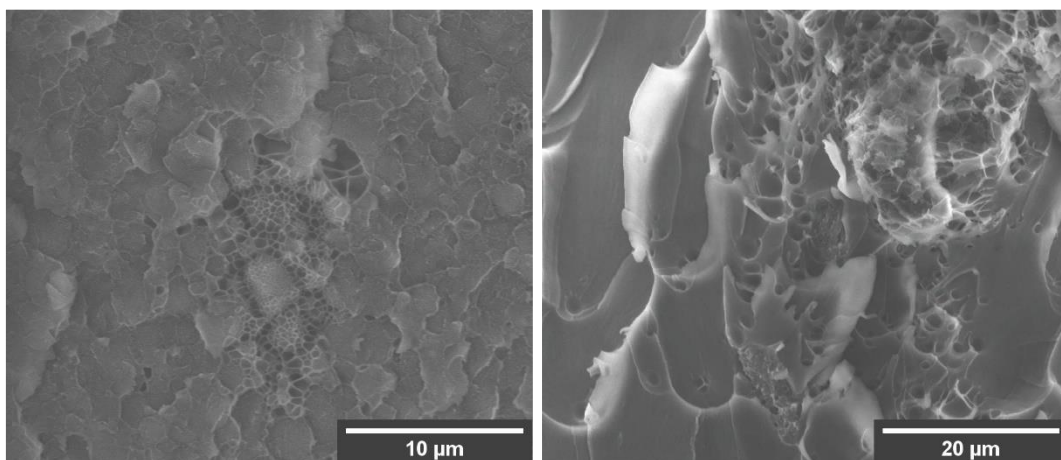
Fracture surfaces of P84 NT, hot compression moulding P84NT_HCM_0_IPA_35 (left) and unfilled P84 samples heated at 300 °C for 3 h under air, P84_0_425_35 (right)
